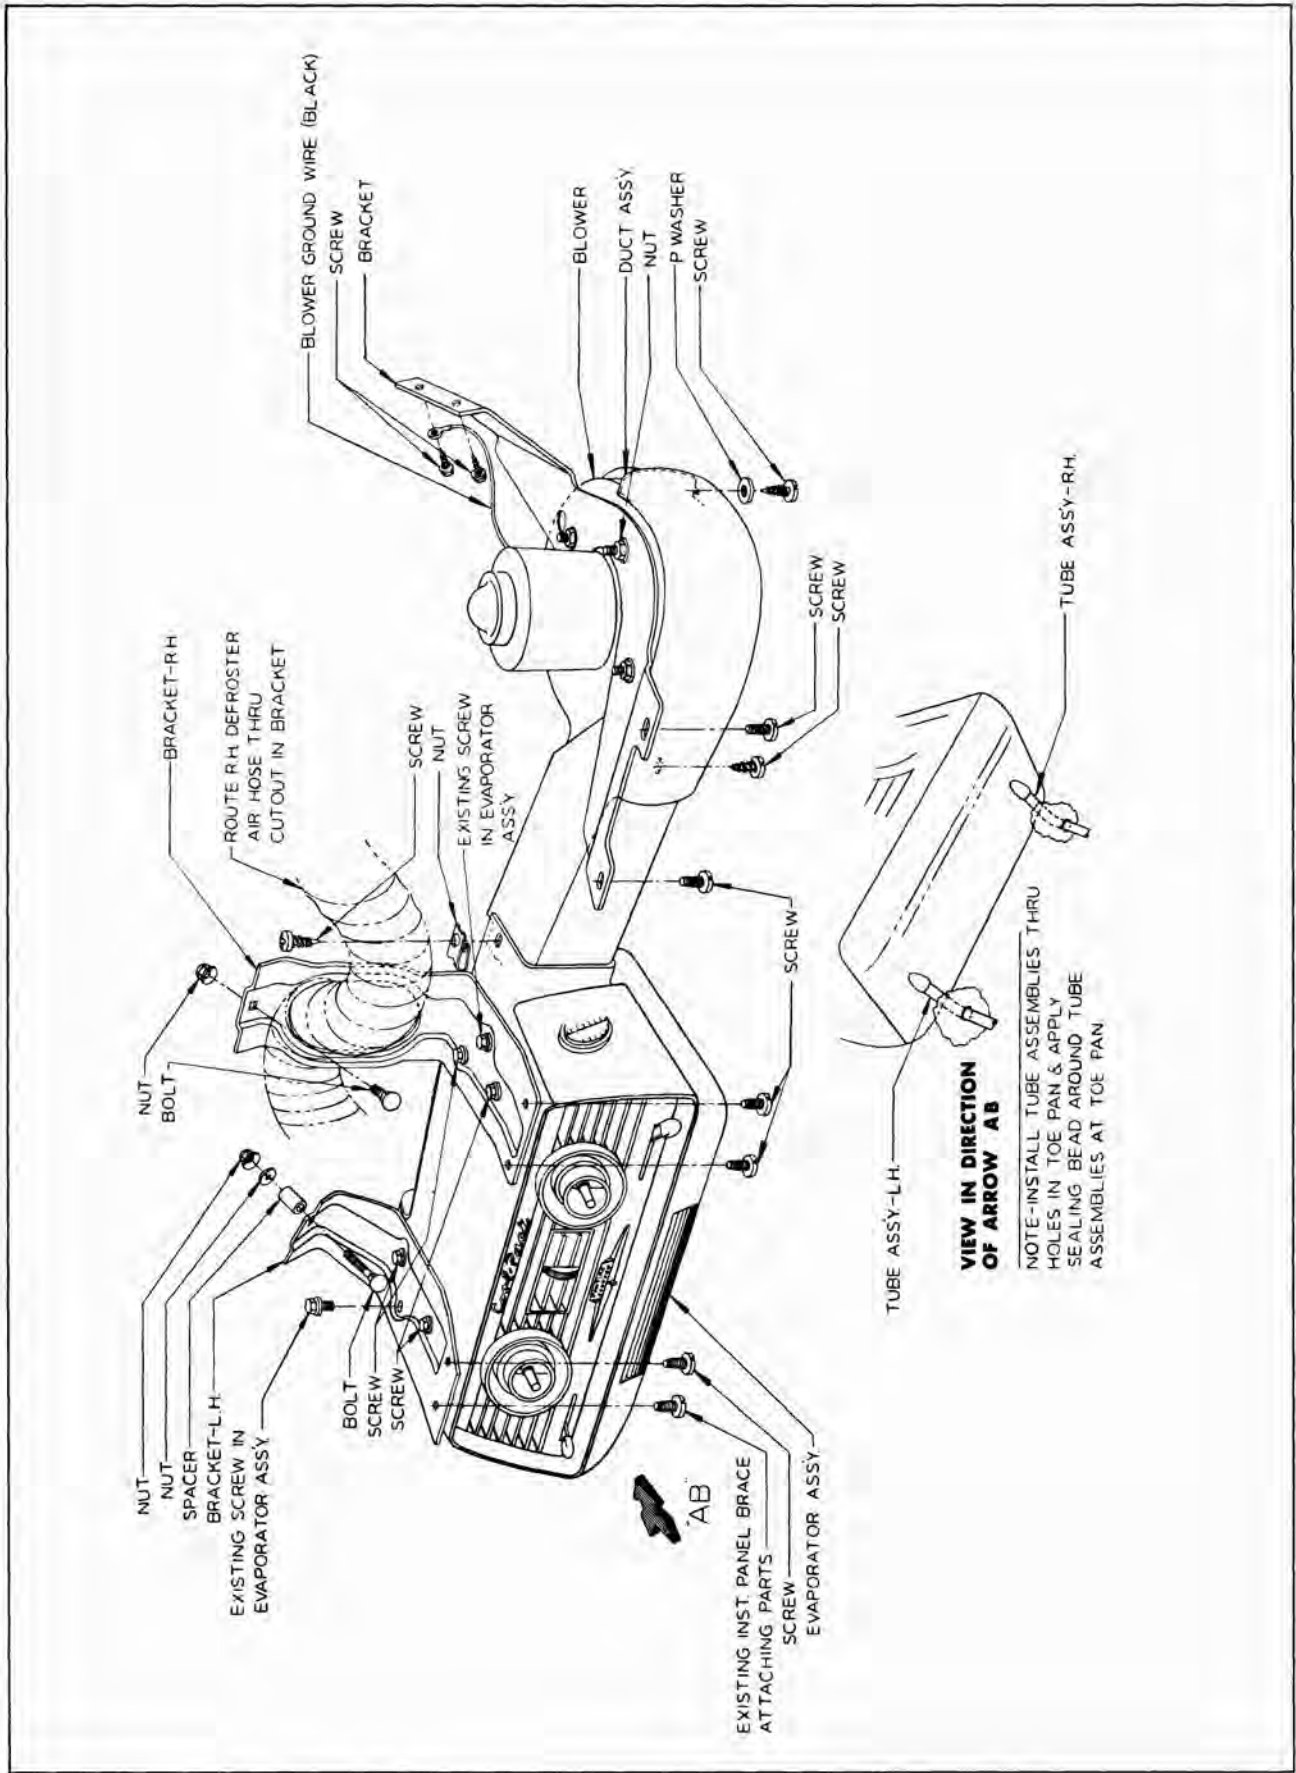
Installation of Pontiac Cool Pack Body Interior Parts
